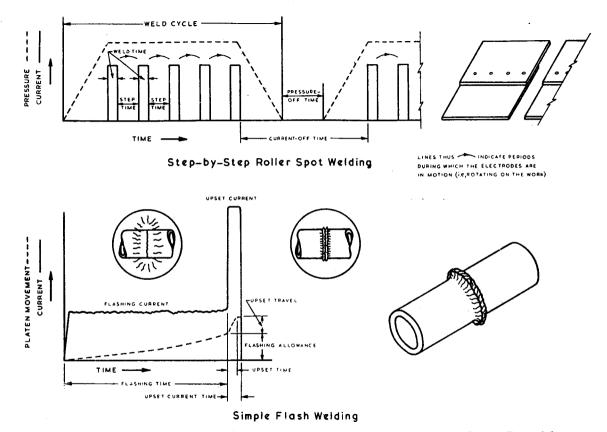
TIME AND PRESSURE DIAGRAMS FOR STEP-BY-STEP ROLLER SPOT WELDING AND SIMPLE FLASH WELDING
